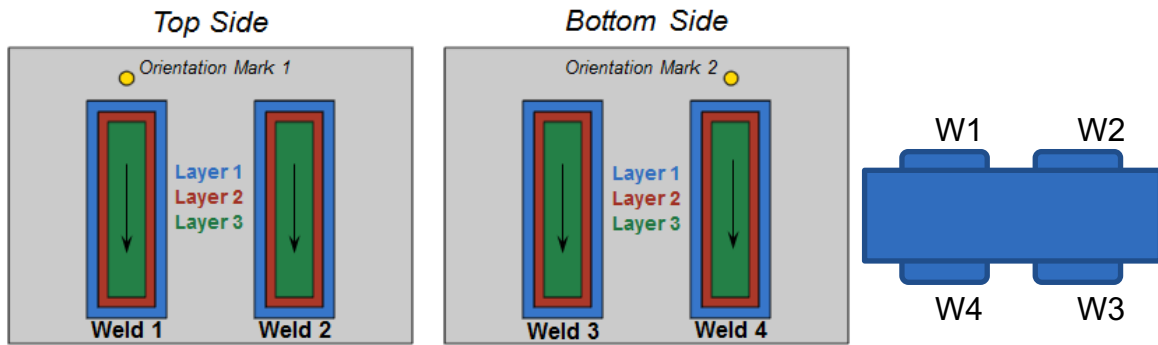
Weld Layout for LW of Irradiated Coupons; Arrows Indicate the Welding Direction.
